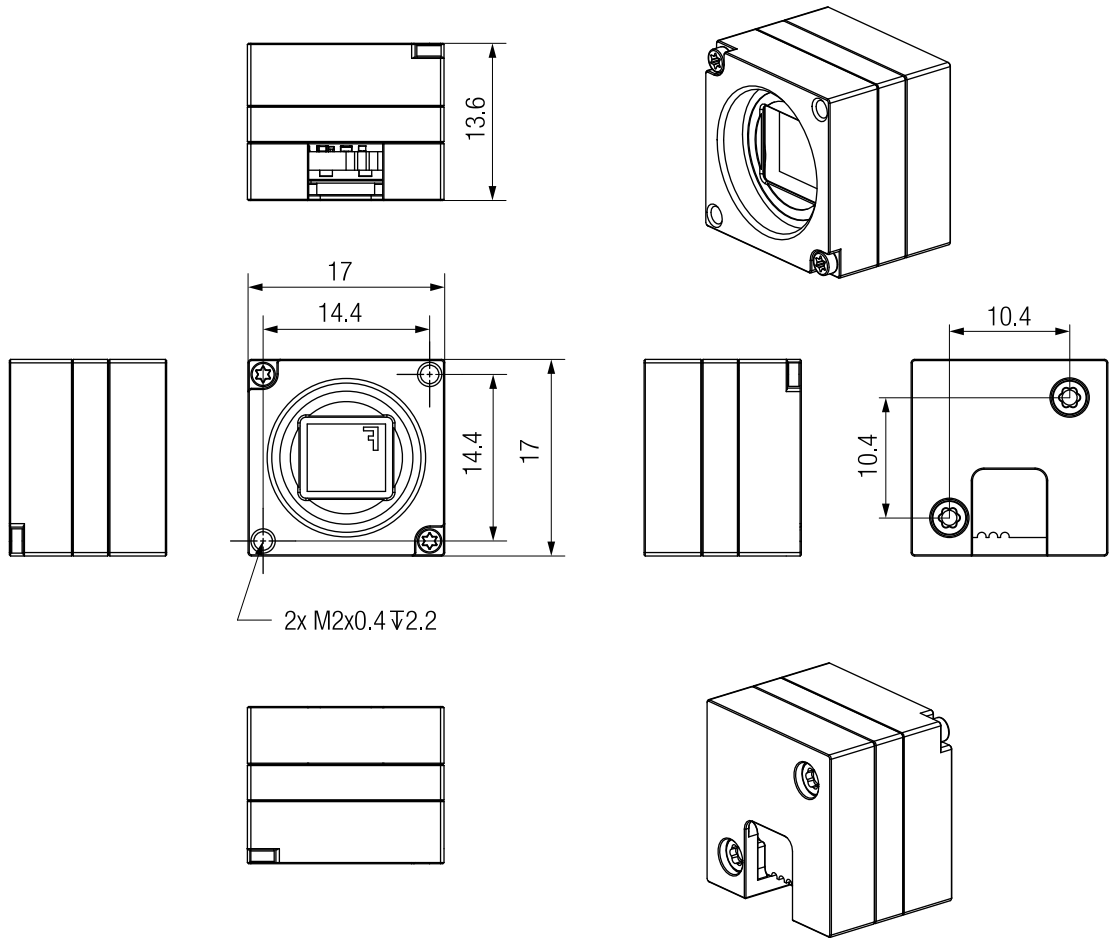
Dimensional drawing of MU051xR-SY with ADPT-MU-17x17-CX3-UC adapter
